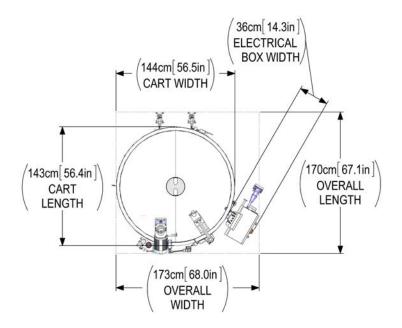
2,000 L S.U.M. dimensions (top view).
